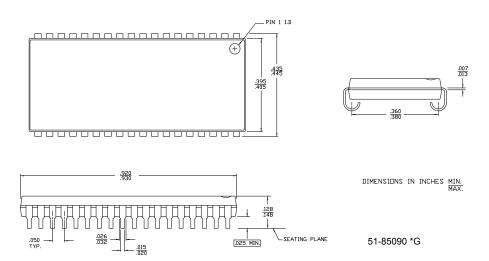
36L SOJ V36.4 (Molded) Package Outline, 51-85090
